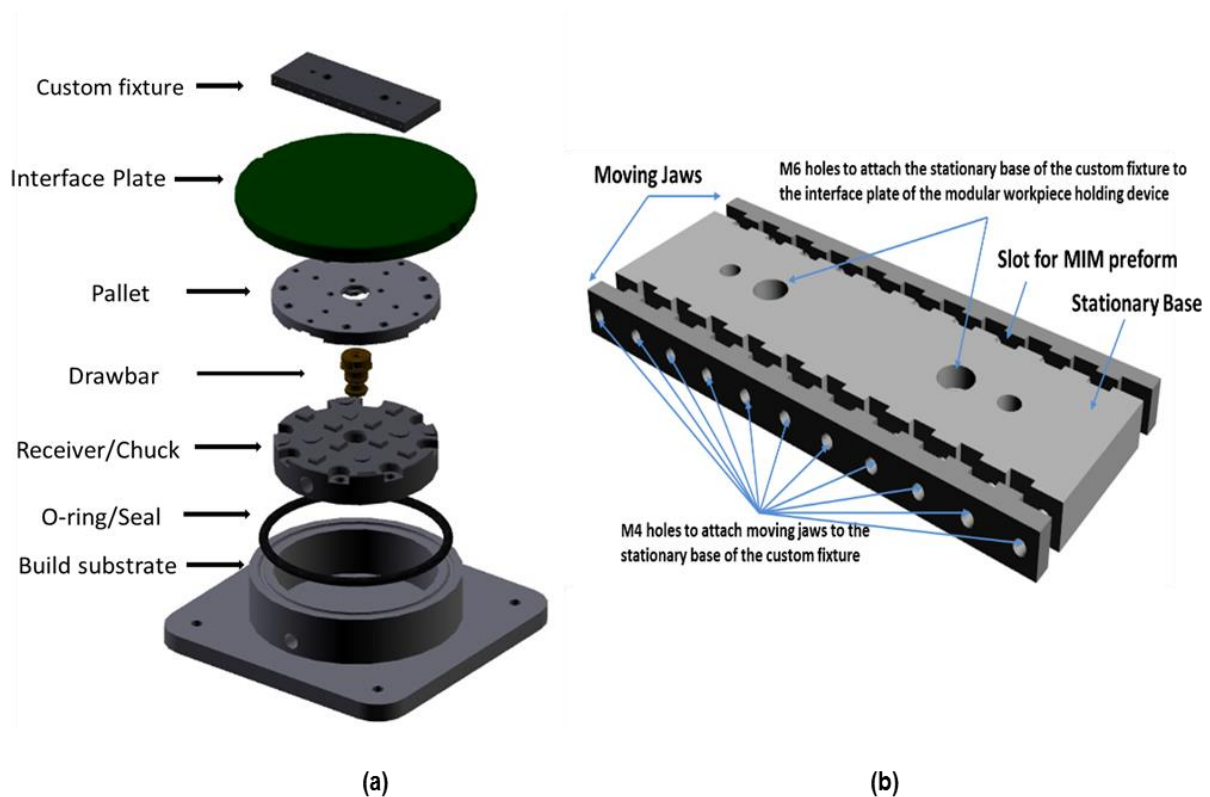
The modular workpiece holding device (a) together with custom fixture for holding 20 MIM preforms during the PBF process (b).
